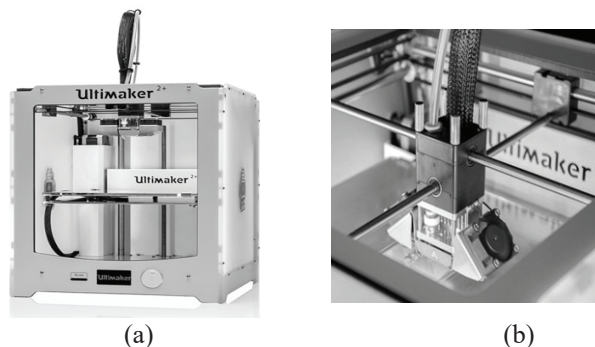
(a) Ultimaker FFF printer (b) extruder head unit
